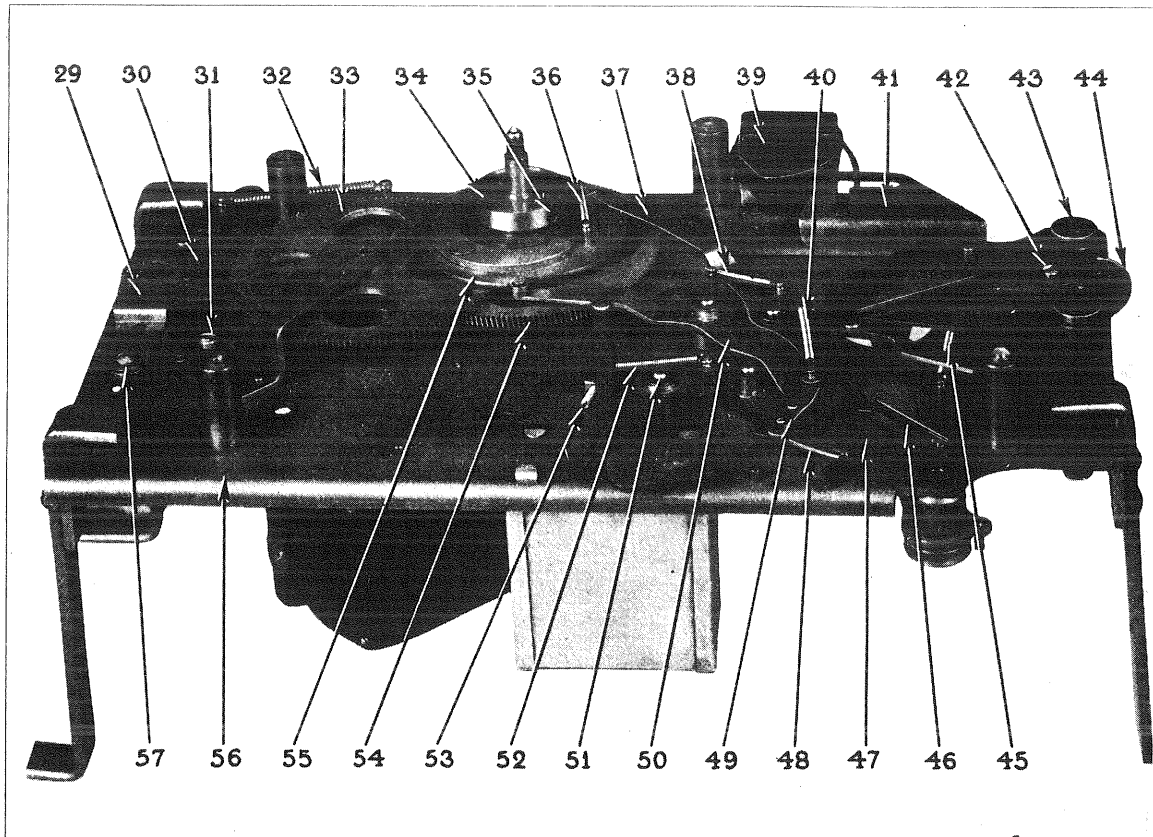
Top View of Automatic Mechanism with Motor Board Removed
